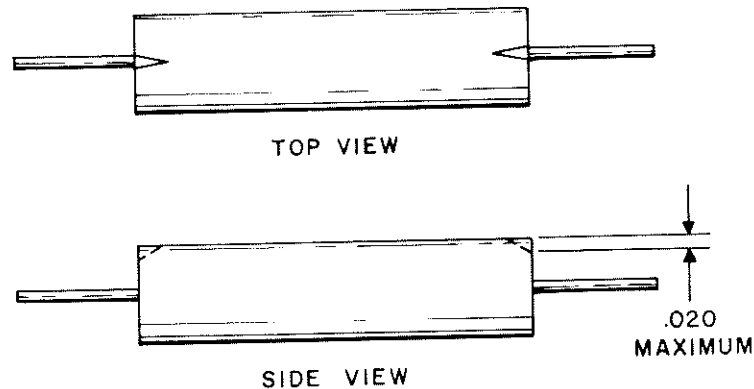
Maximum Depth of Resistor Notches for Coil Winding
